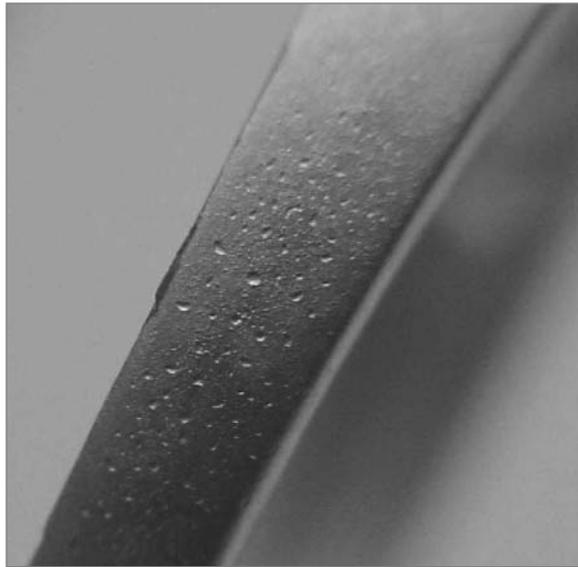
Defect caused by mold release liquid preventing the wax from reaching the mold surface
